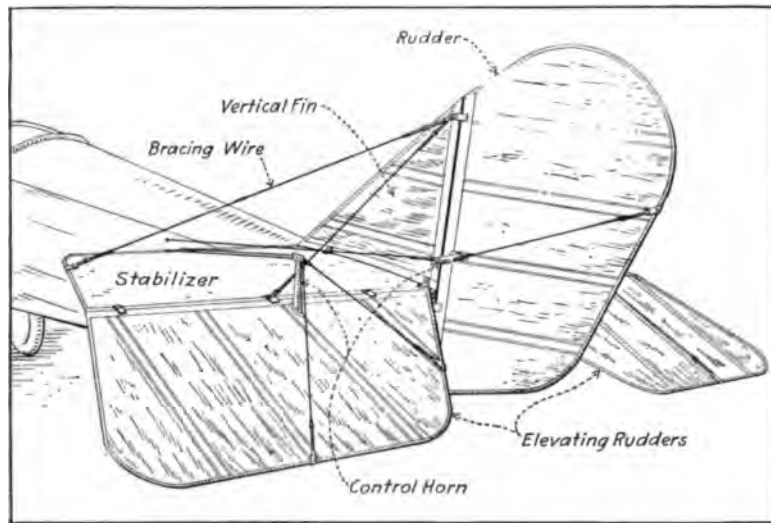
Typical Empennage of a Modern Flying Machine Showing Various Parts.
